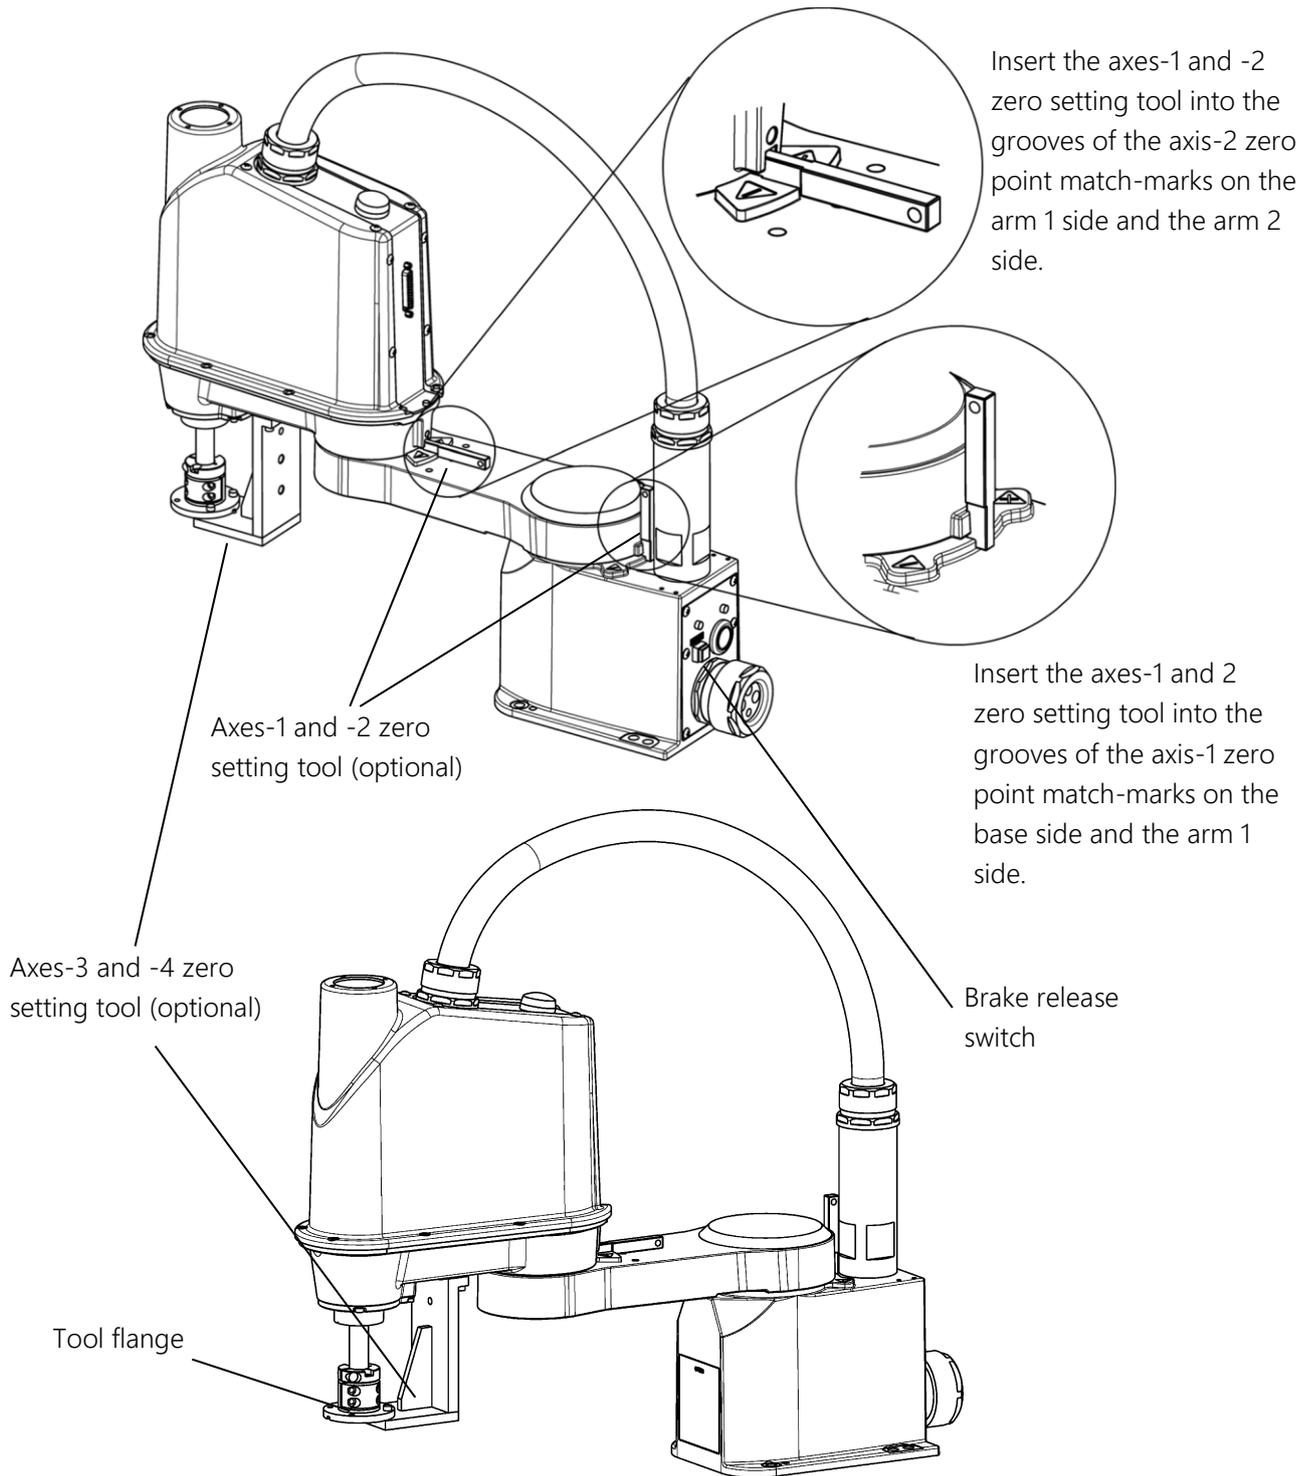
Installing the Zero Setting Tool (Optional)
